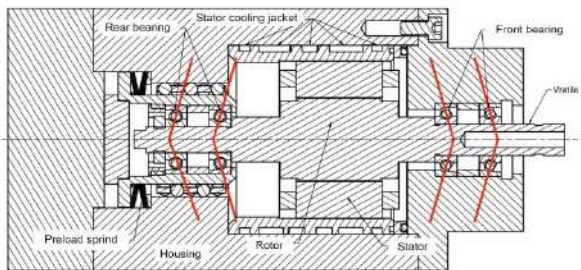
Cross section of GMN TSSV 90000 motorized spindle assembly
